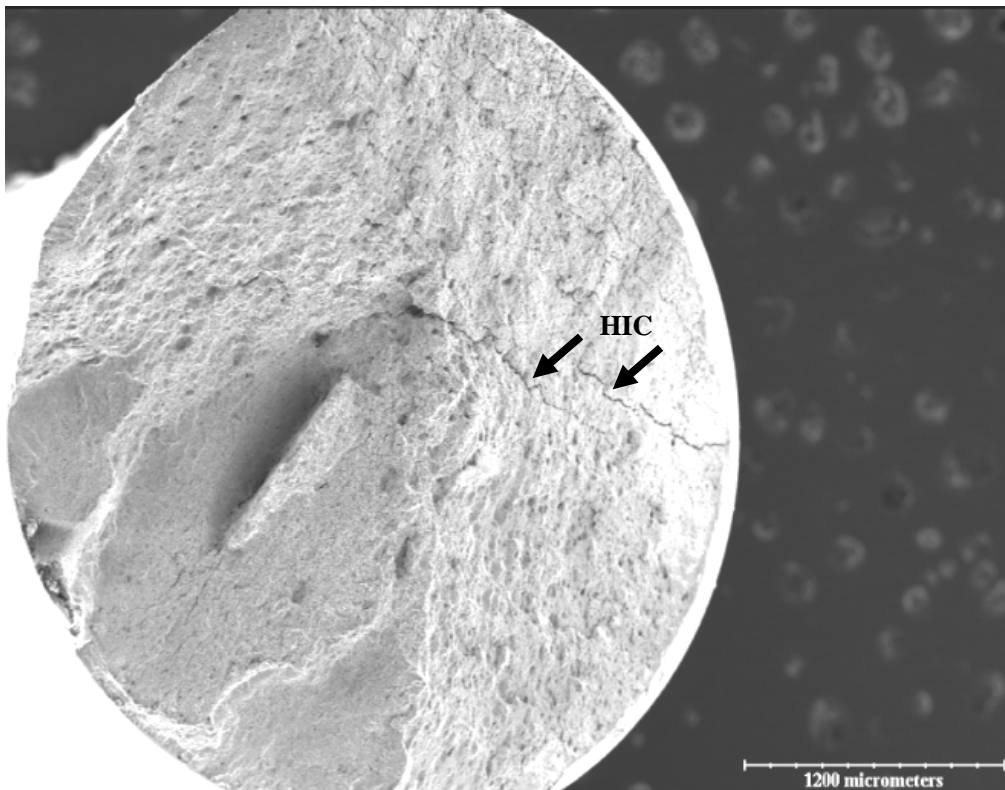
HSLA 80-2 fracture surface.
